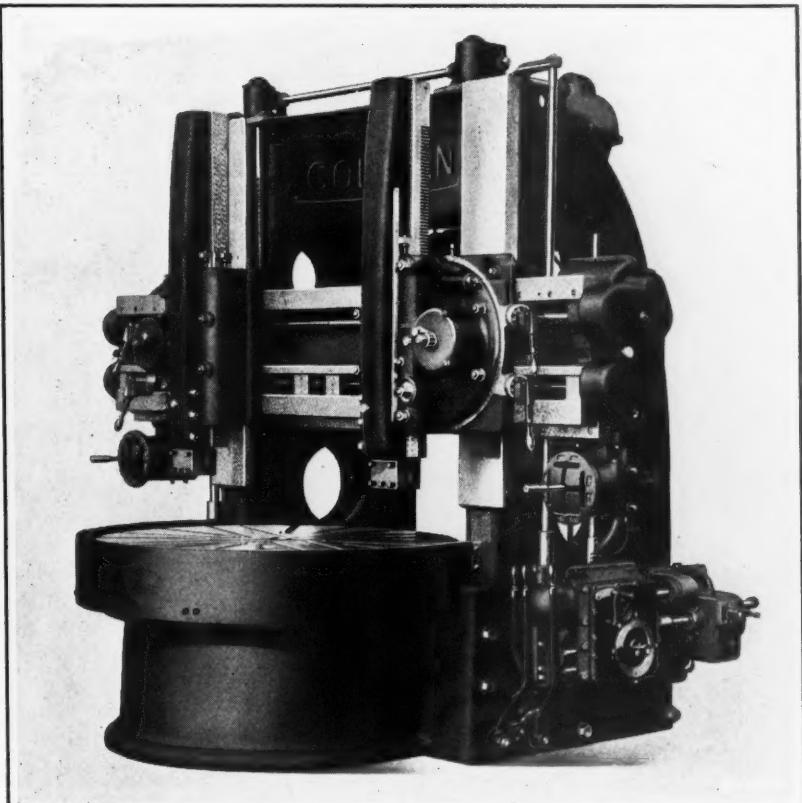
Heavy-duty Vertical Boring and Turning Mill made by the Colburn Machine Tool Co.
